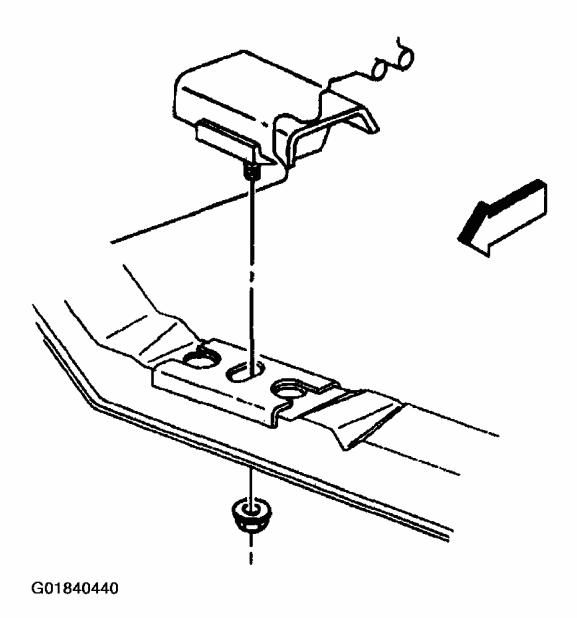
Installing Rear Engine Mount-To-Transmission Support Nut
